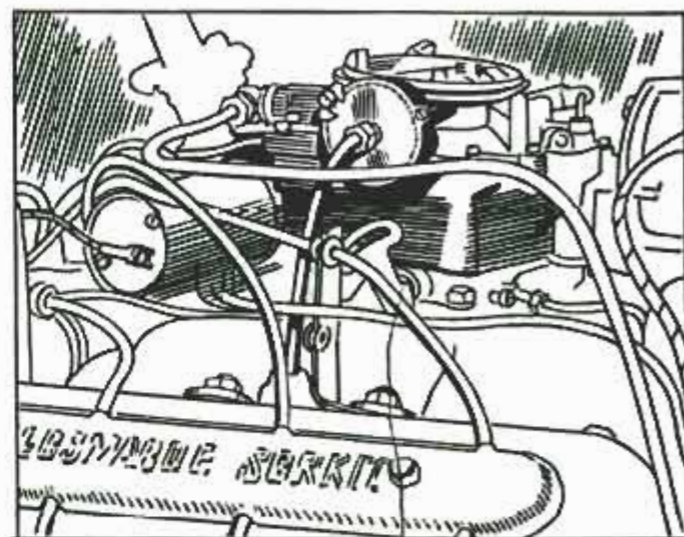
Automatic-choke housing and tubing connection to it should be tight, so there is no leakage of hot air, assuring rapid opening of the choke
